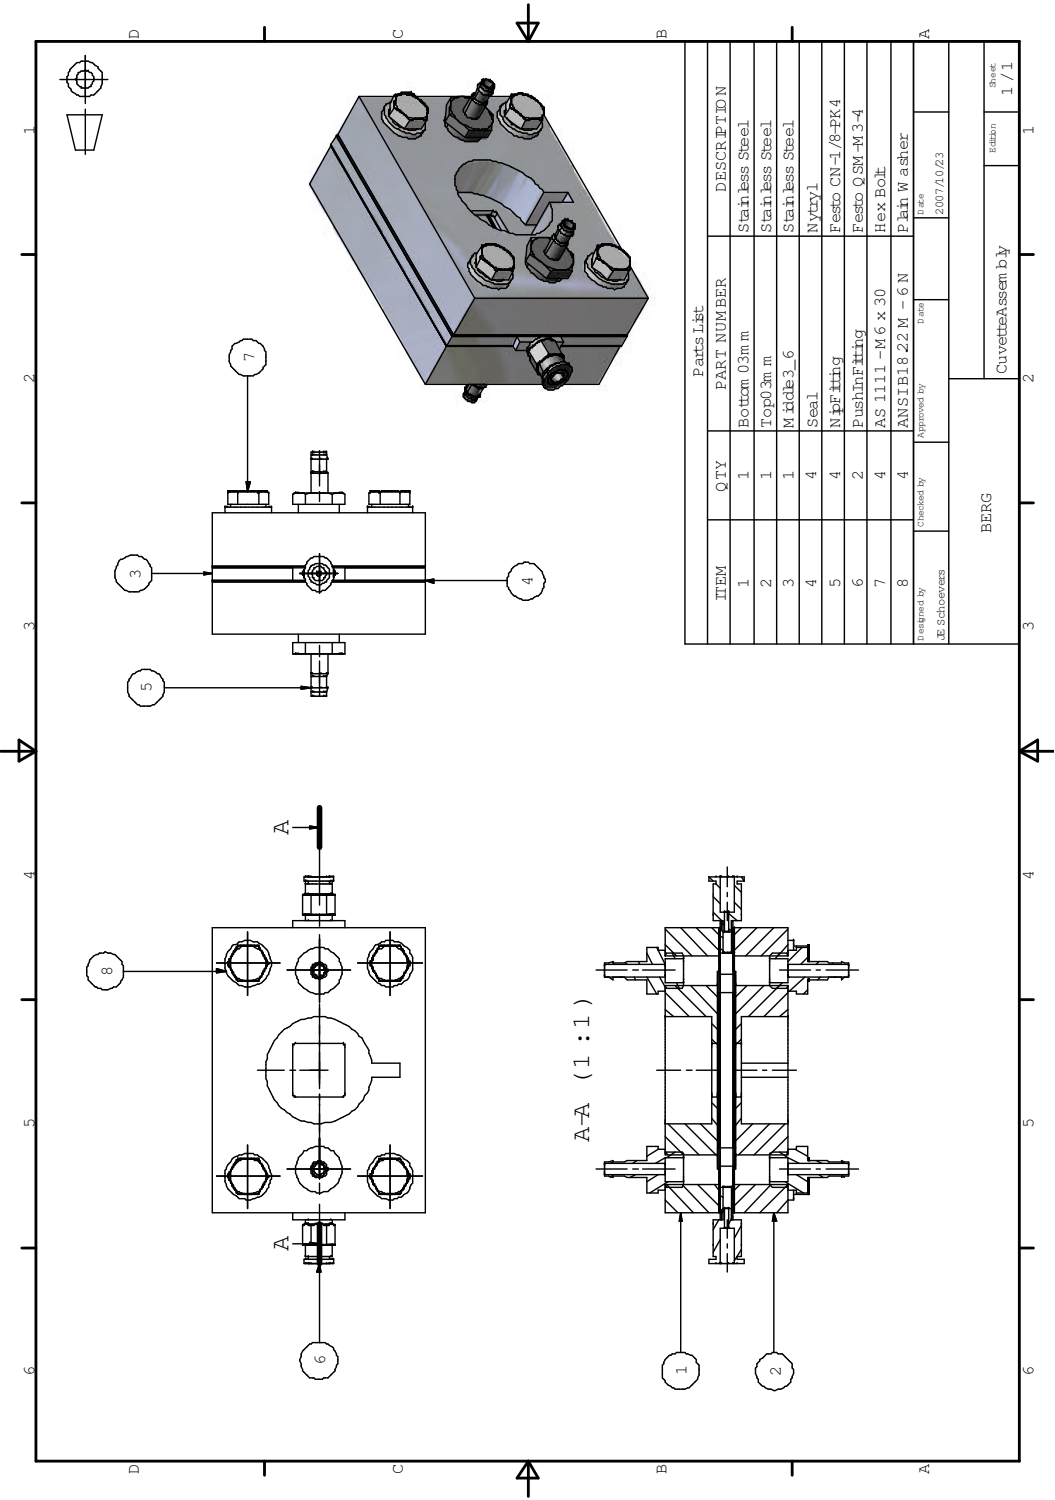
Cuvette Assembly (AutoDesk Inventor 9)
